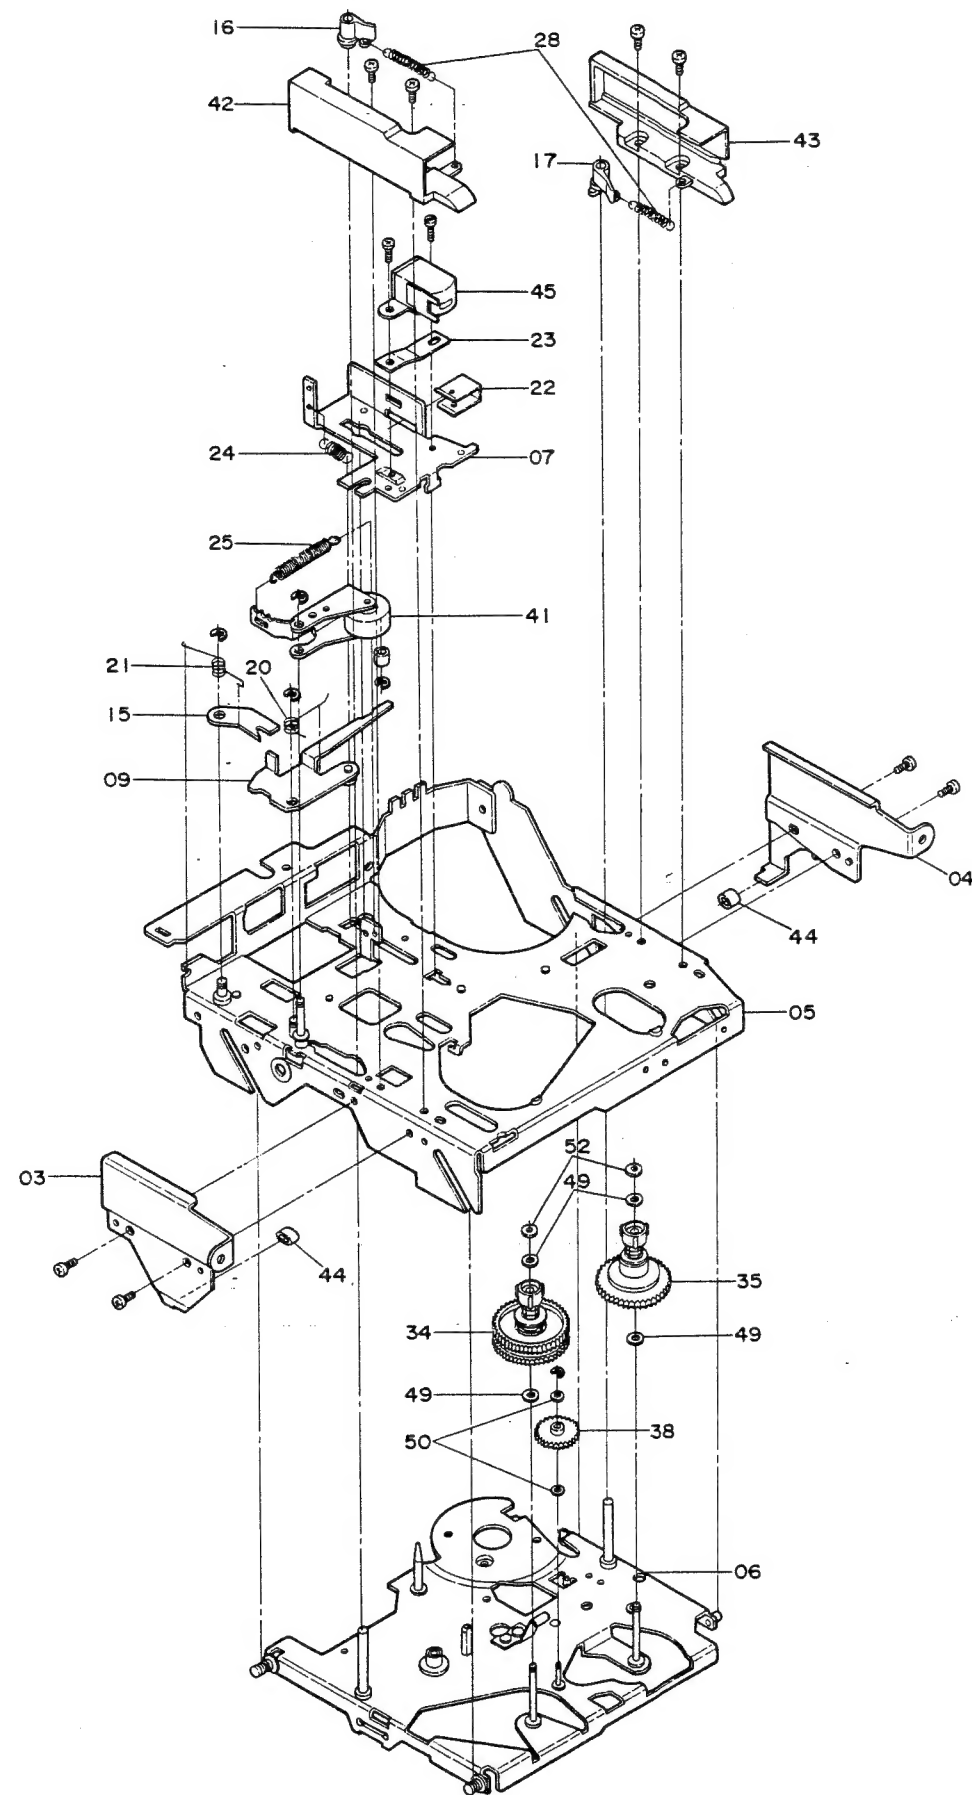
MECHANISM EXPLODED VIEW (UPPER SIDE)
